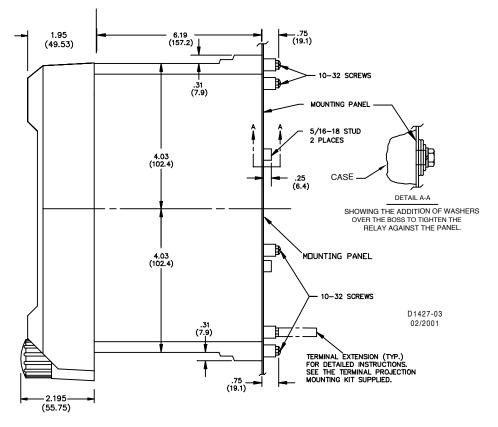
S1 Case, Double-Ended, Projection Mounting, Outline Dimensions, Side View
